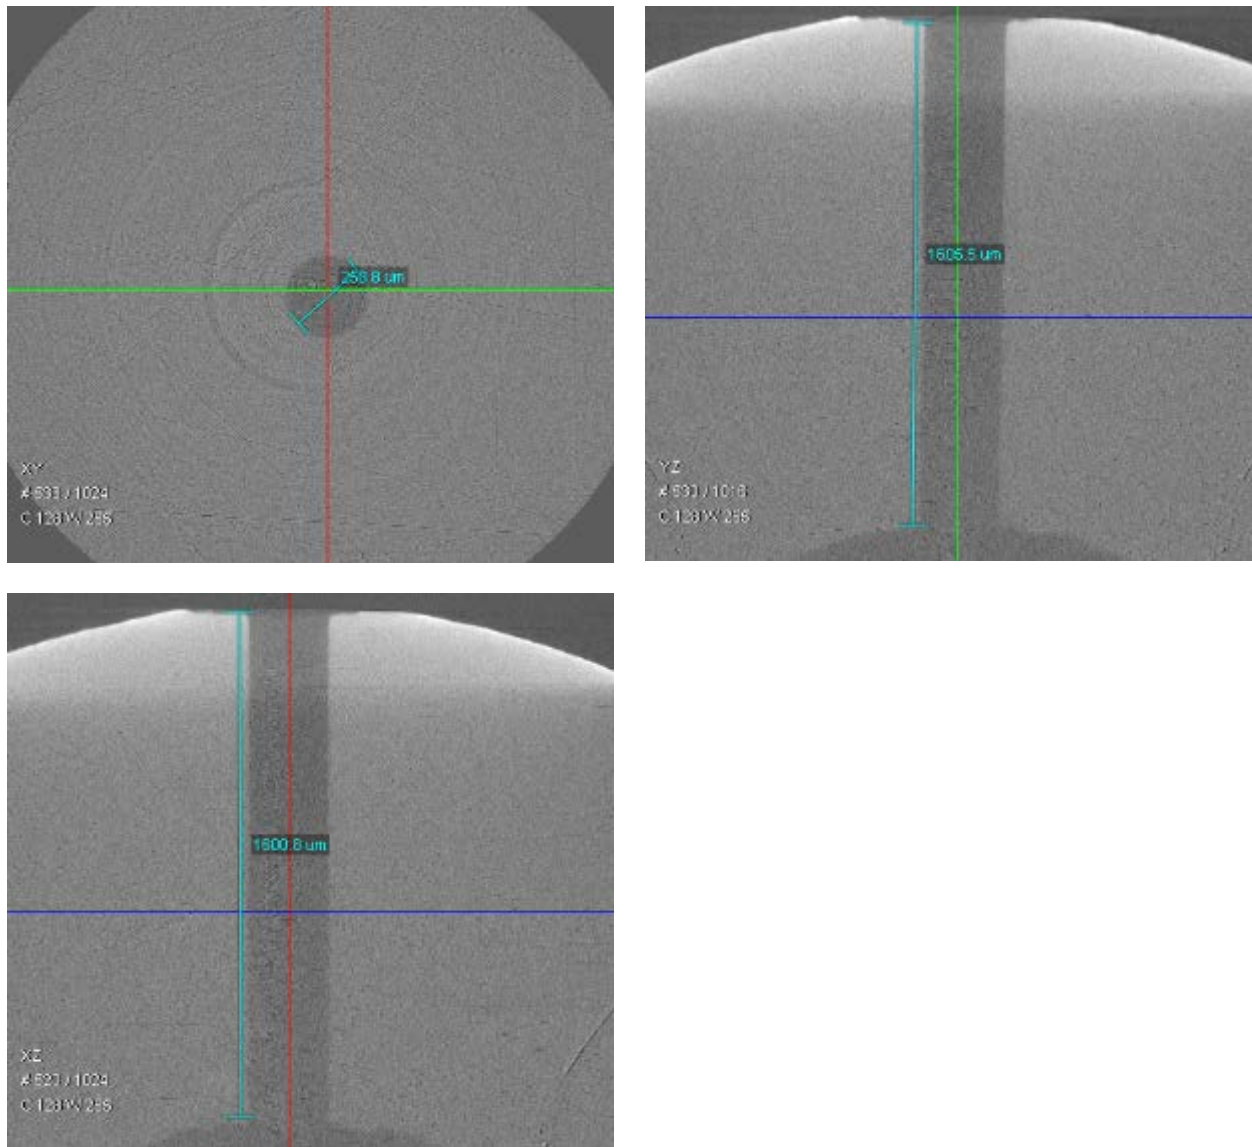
X-ray tomography test shows the length of the nozzle hole which is about 1600 μm .
